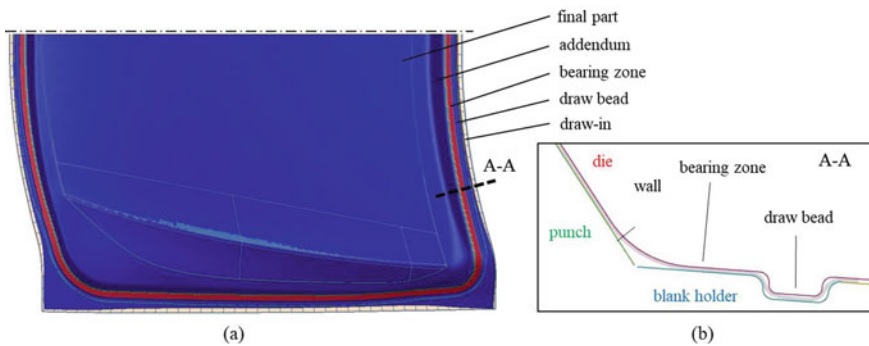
a Drawing geometry; b cross-section A-A of the addendum
